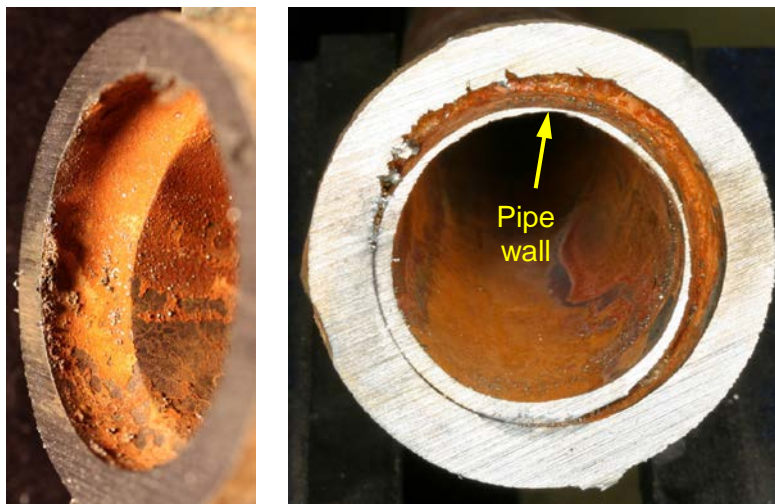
Transverse section thru pipe and elbow at elbow outlet
